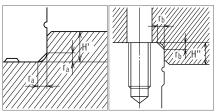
Shoulder for the rail datum surface slide datum surface
